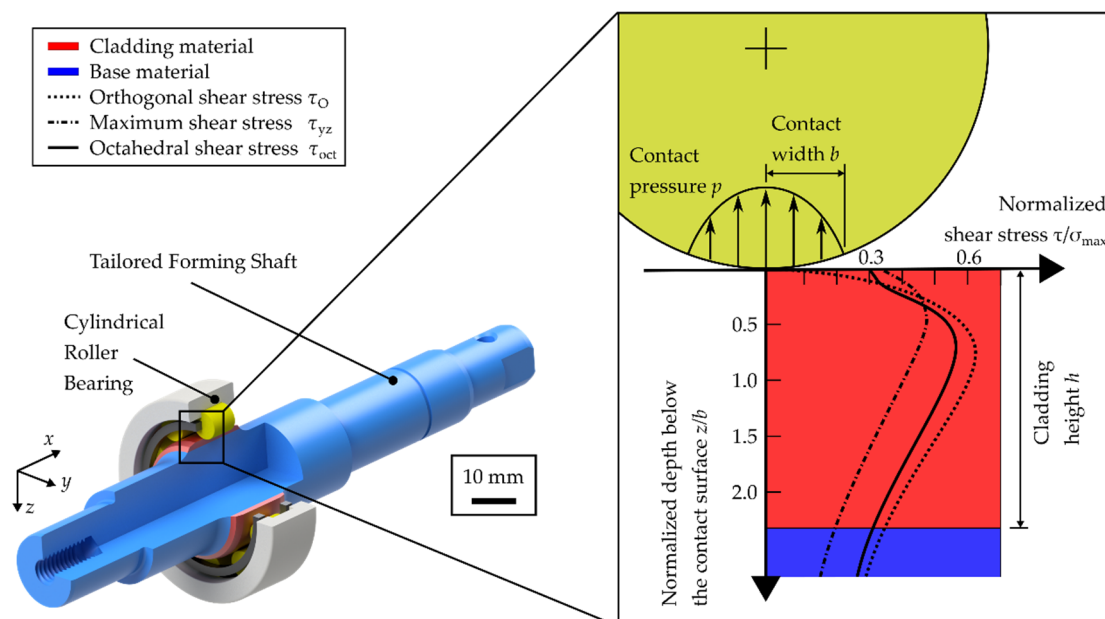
Partial section of tailored forming shaft with mounted cylindrical roller bearing (left) and loaded material volume (right).
